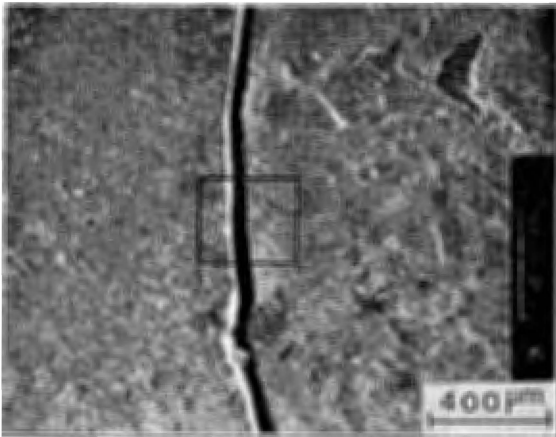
Fretting fatigue crack and surface damage formed on SNCM439 steel
